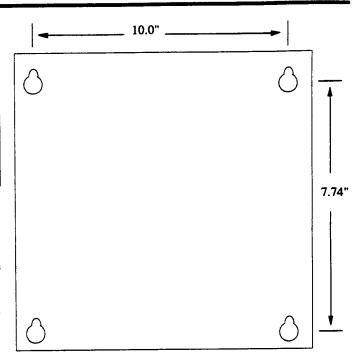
Miniterm Cabinet Mounting Hole Dimensions
